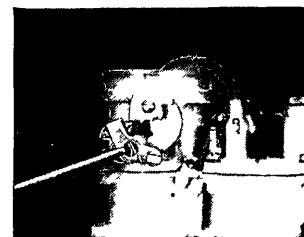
Install fast idle cam, washer and choke trip lever on choke shaft. Then install fast idle arm, pin and screw, and fast idle spring
